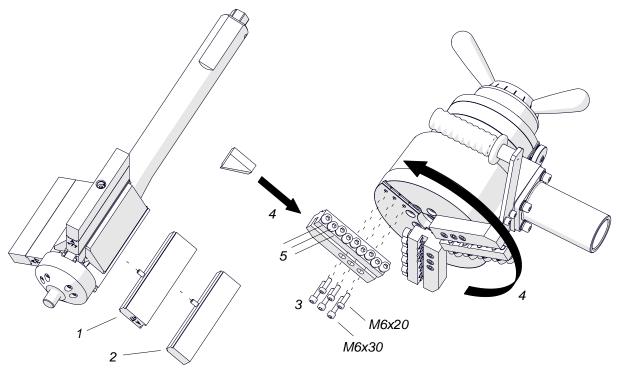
Installing the jaw blocks, adapters, tool holders, and tool bits
